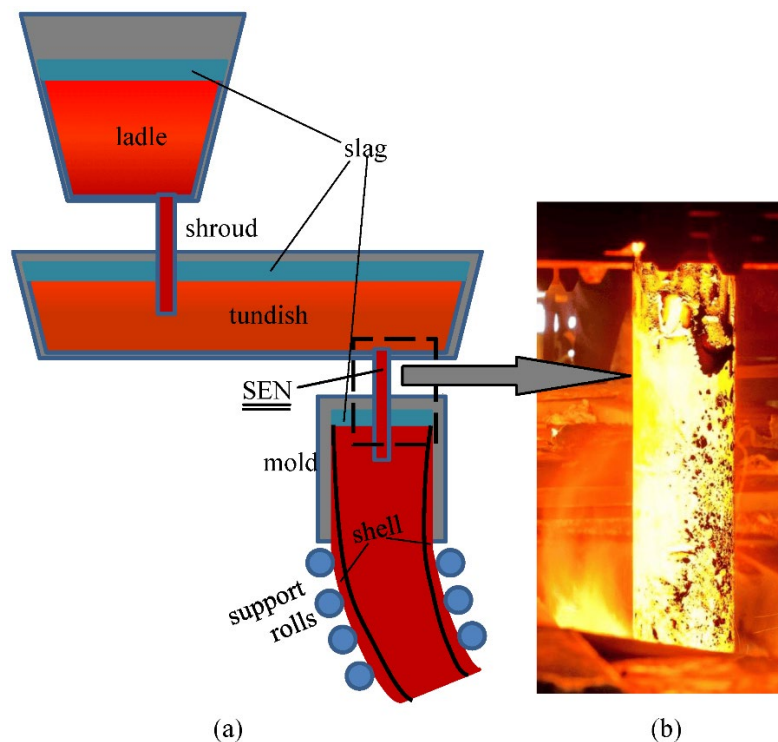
The continuous casting process of steel making showing the position of SEN located between the tundish vessel and the mould during casting. a) Steel arrives at the continuous casting process in a ladle vessel which empties its content on the tundish vessel and then onto the mold for steel cooling and solidification. Slag is added to protect steel from oxidation and remove impurities. b) An actual image of a SEN during casting[4].
